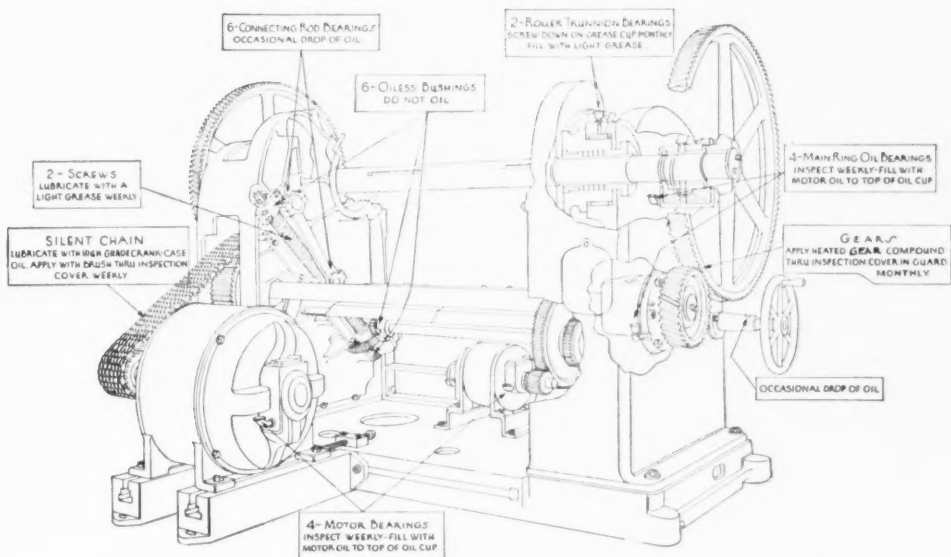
Points requiring lubrication on a Benjamin Franklin Dough Mixing and Kneading Machine. All parts, with respective suggestions, are clearly indicated.
